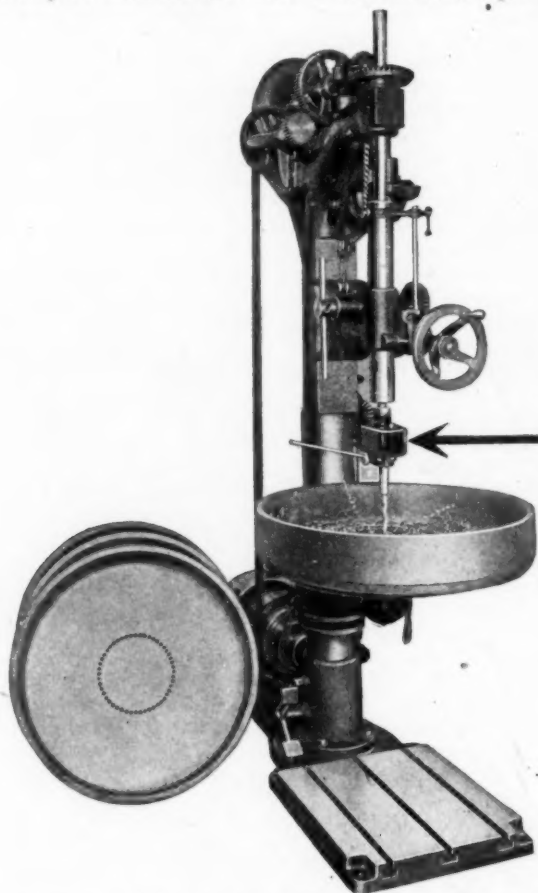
AN EXAMPLE. DRILLING $\frac{7}{16}$ " HOLES IN BOILER HEADS $\frac{11}{16}$ " THICK.
